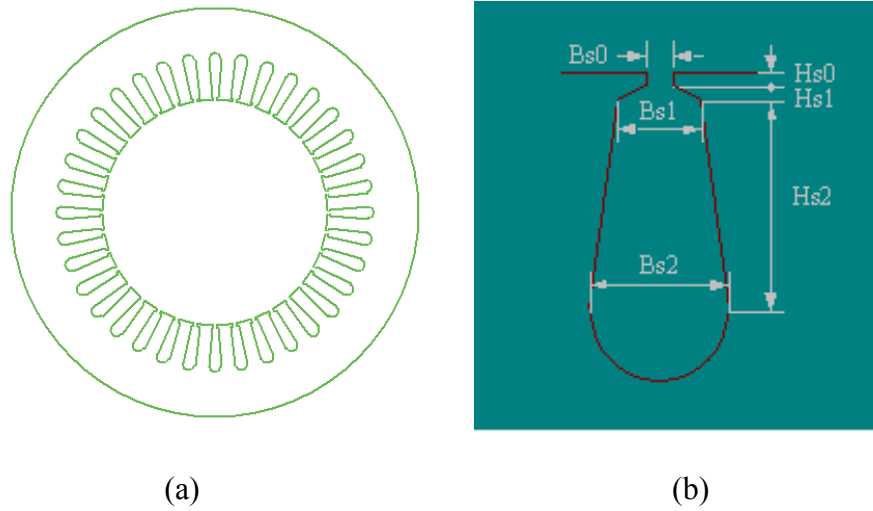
Induction machine stator cross section: (a) Stator geometry, (b) Stator slot dimension.
